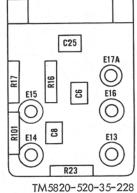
Printed circuit board 1A12XV1, parts location diagram.
